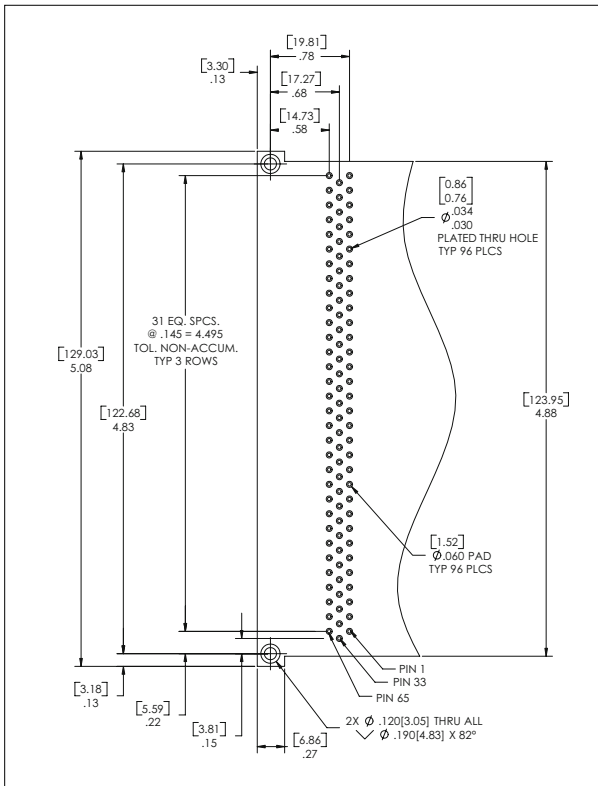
recommended board layout. Solder side shown.
